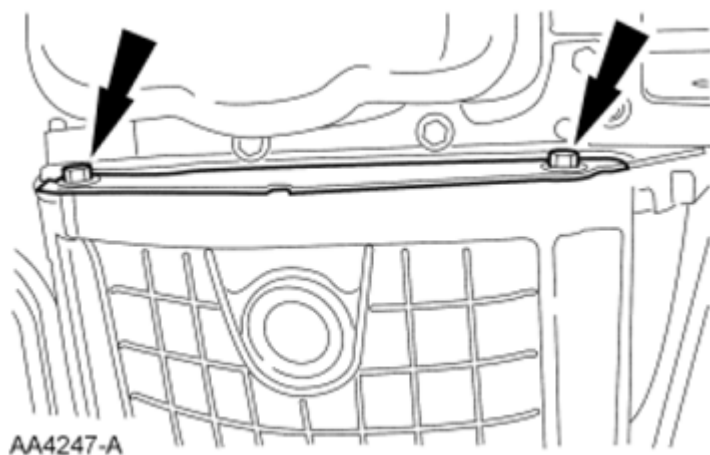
Locating Flexplate Inspection Cover And Bolts
